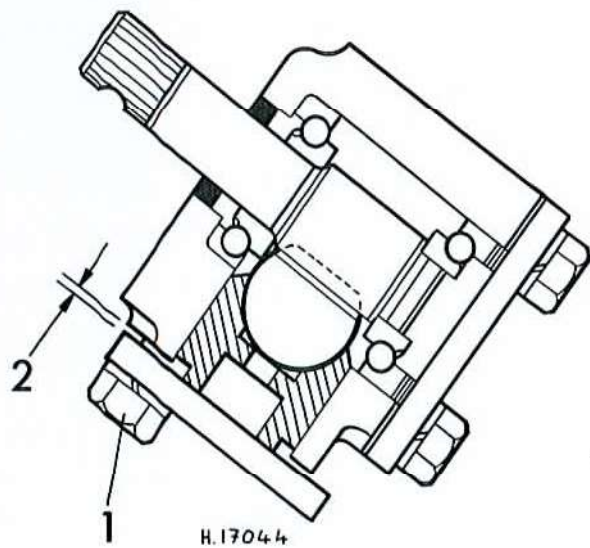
Reassembly of the rack damper (Sec 30)
